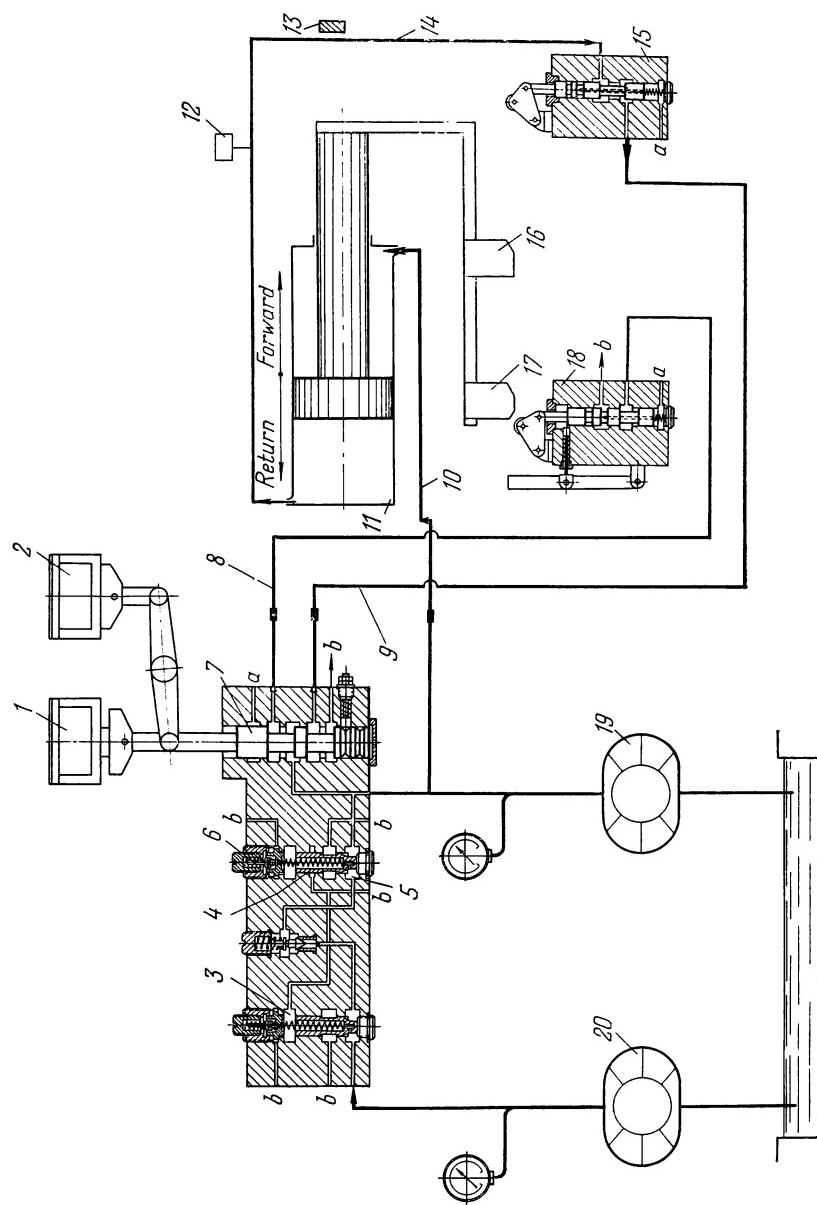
Hydraulic circuit diagram of a transfer bar drive:
